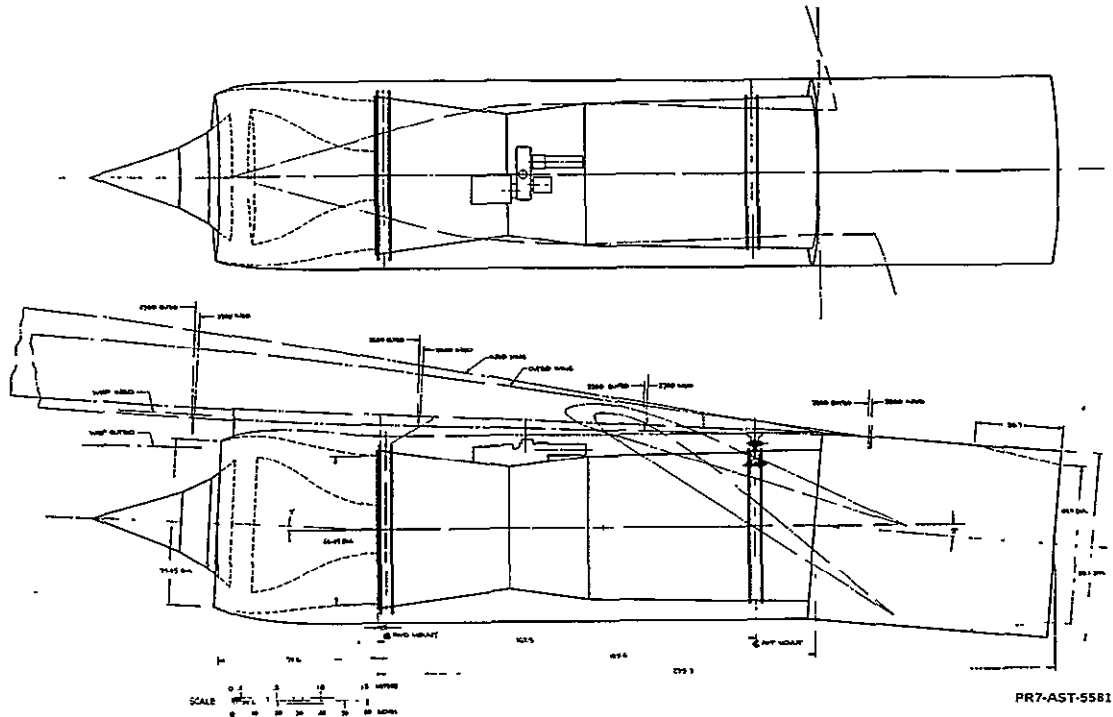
Installation Drawing of Rear-Valve VCE-112CD Engine
